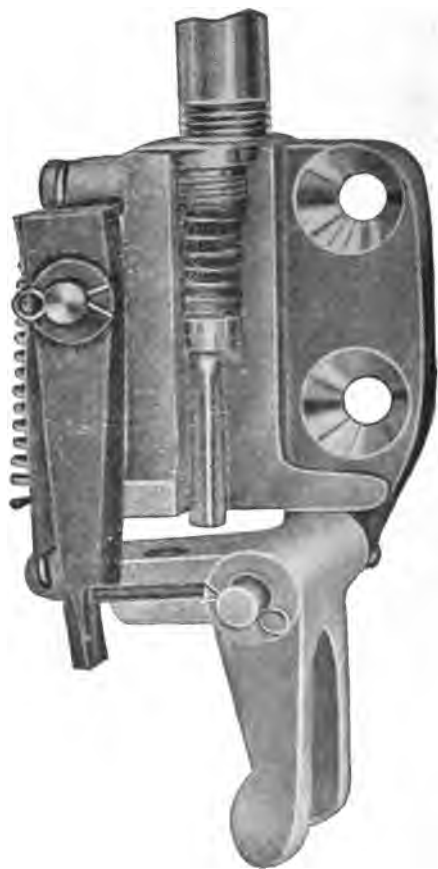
Pilot Valve Emergency Air Brake Attachment.
